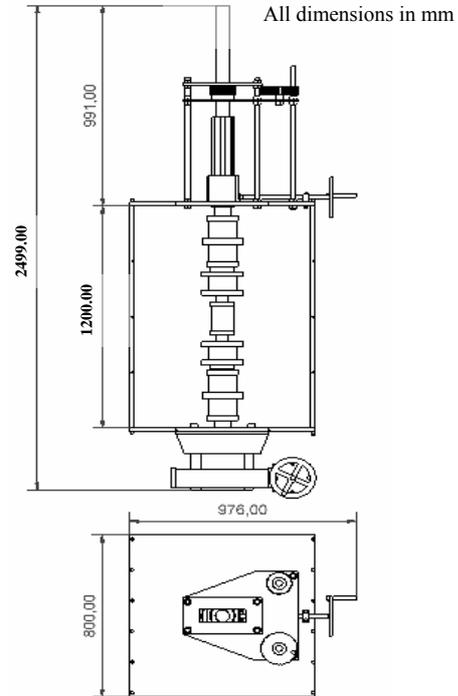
Assembly drawing for NIS 3kNm torque standard machine.
